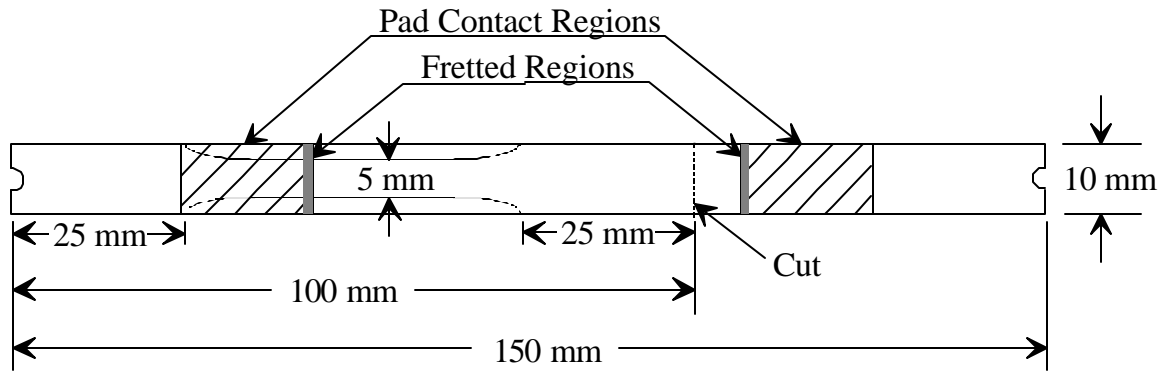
Schematic of post-fretting machining for 150 mm fretting specimen.
